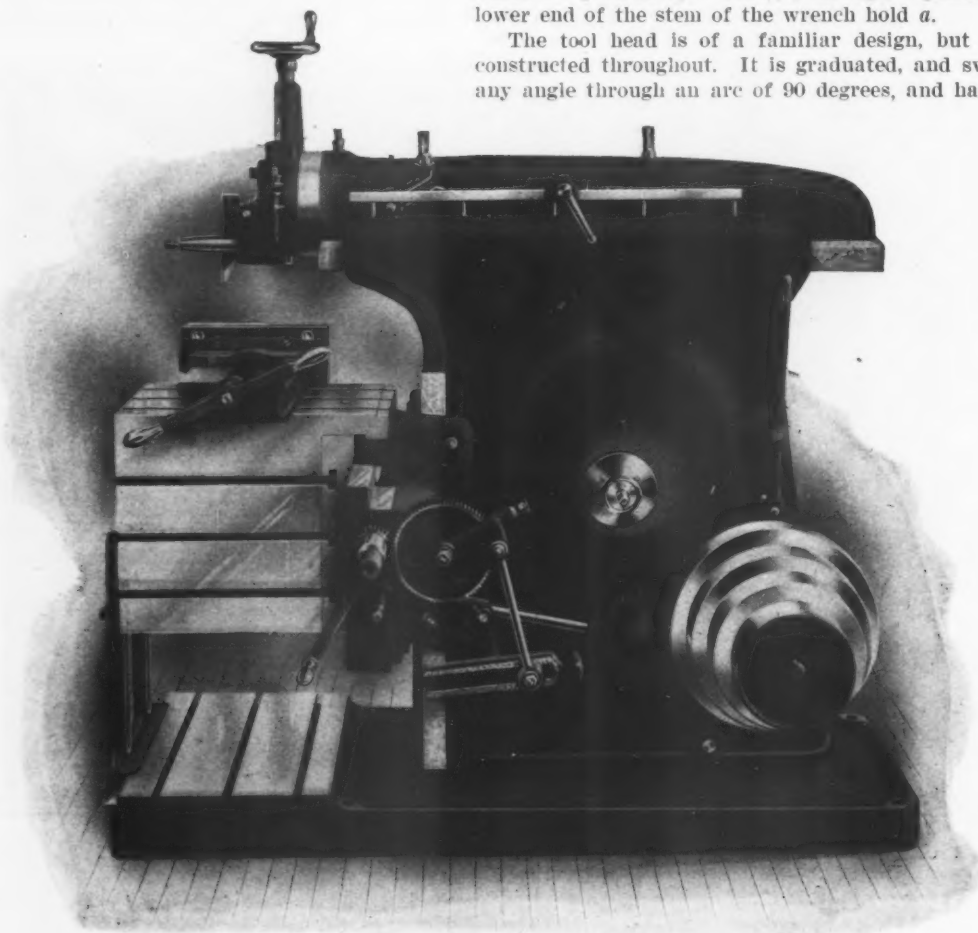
The New Shaper Built by the Walcott & Wood Machine Tool Company, Jackson, Mich.
